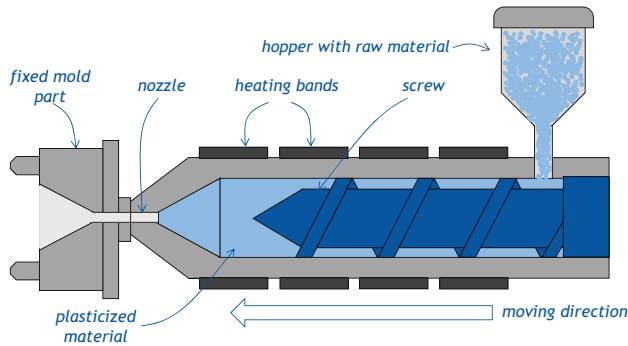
Detailed view of the plasticizing unit of an injection molding machine.
